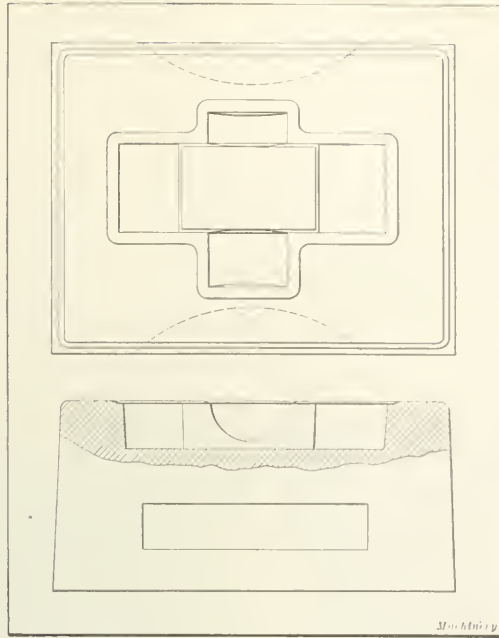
"Drop-ferge" Type of Die used for making Die-pressed Castings
